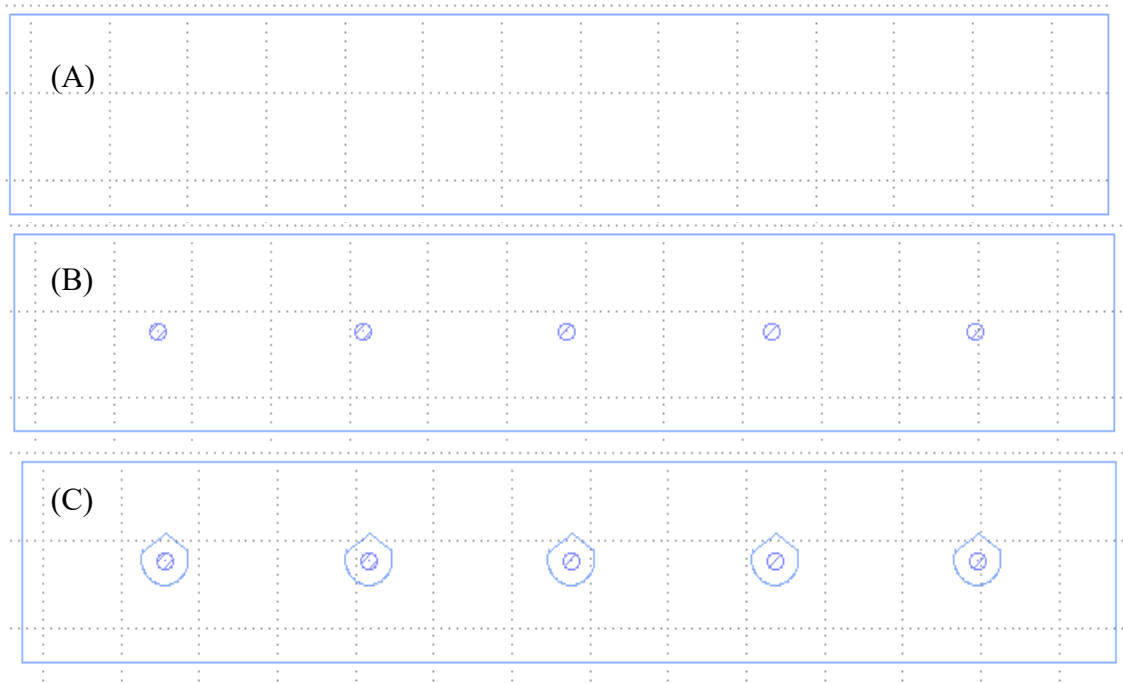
AutoCAD Design for a Singular MNA: (A) Bevel; (B) Bore; (C) Shaft
